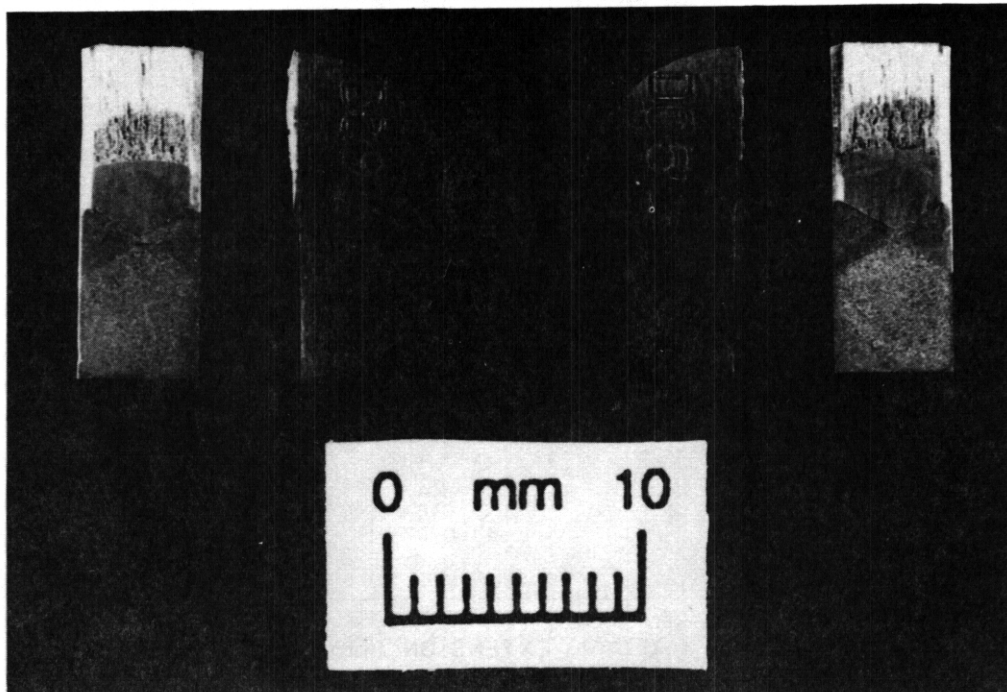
Fracture surfaces from two of the disk compact specimens. Note the chevron notch to assist in precracking, and the side grooves added after precracking was finished. The fracture surface shows that crack growth occurred with slight tunneling, but there was little distortion of the specimens' shape.
